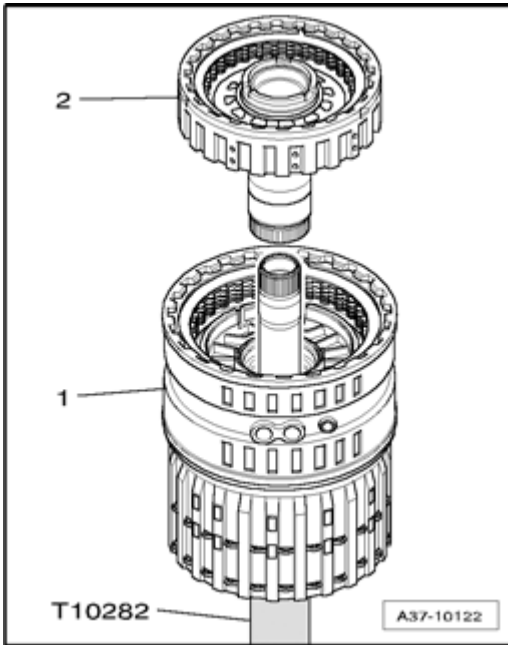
Removing/Installing Clutch "C" With Sun Shaft From Cylinder "D/E"
